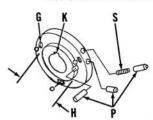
inspect driving plate ball grooves (G), detent pins (P) and their bores, and keyway (K) for any noticeable wear. Driving plate hub outside diameter (H) should not be less than 58.8 mm. Detent pin spring (S) free length should be 320-325 mm.
